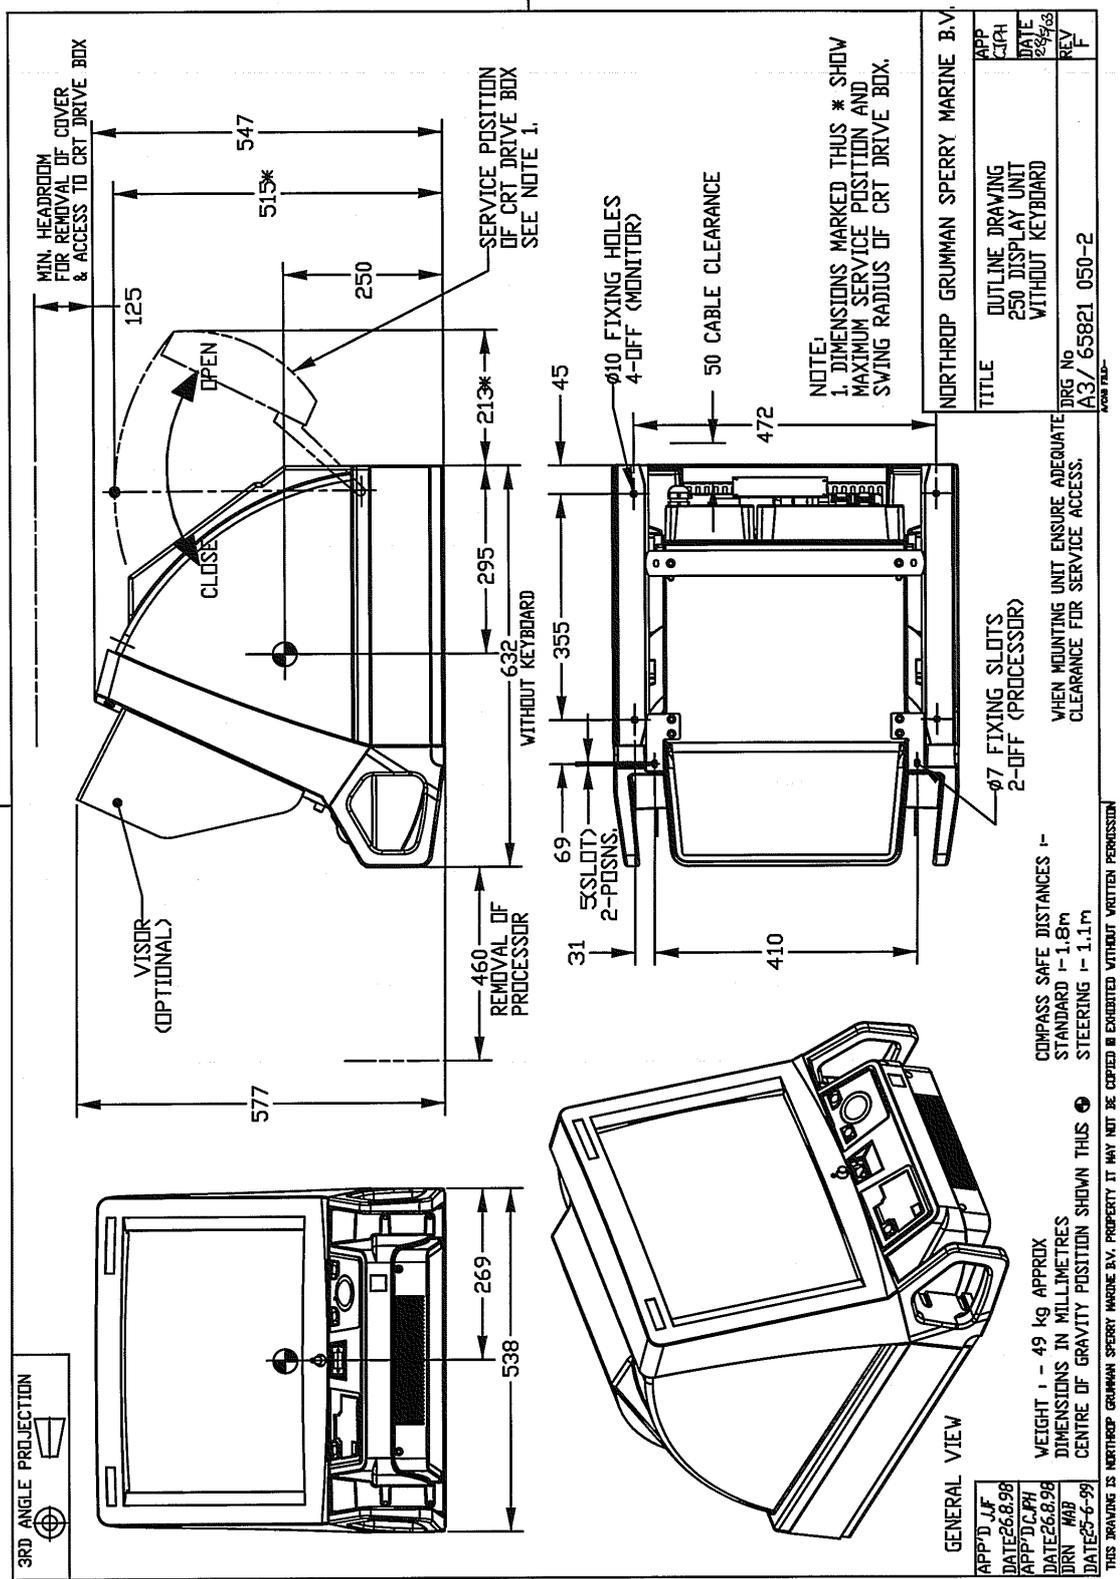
250 Display Unit (CRT) Outline Drawing
